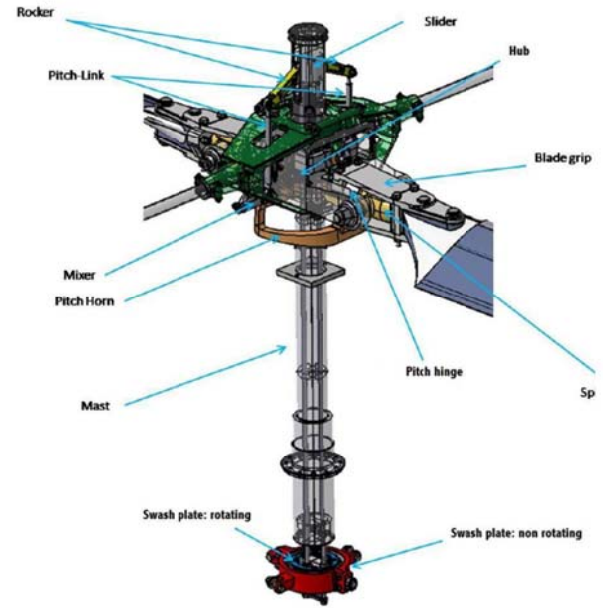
CATIA model of the shaft-rotor head assembly considered in this work (courtesy of K4A S.p.A.).
